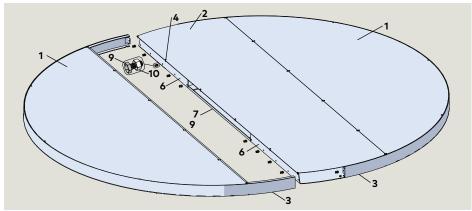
3 1/8" canopy assembly, split for shipment, covers removed
